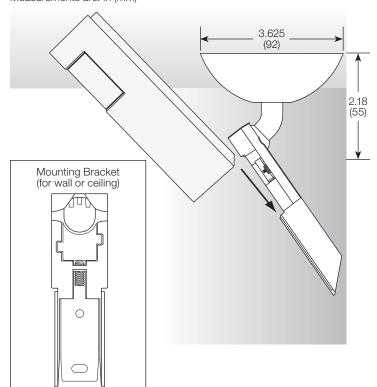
° Wall-Mount Sensor and Hallway Sensor
